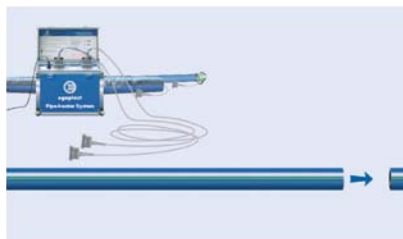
The pipe ends are prepared optimally for secure welding
